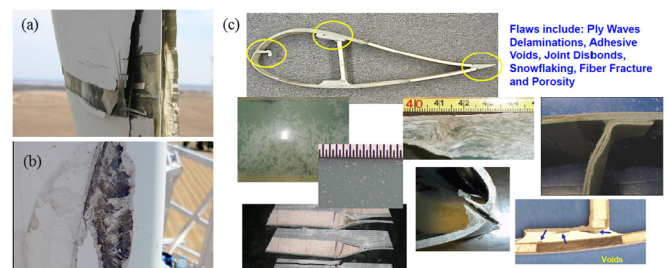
(a) Trailing edge blade damage [170]; (b) leading edge blade damage; (c) various blade inspection areas and common flaw types of interest [171].
